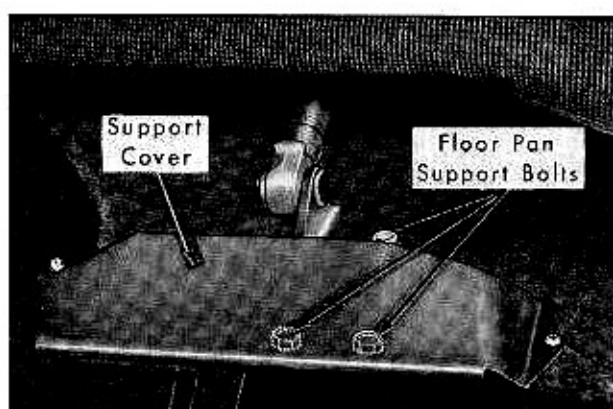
Horizontal Regulator Floor Pan Support Cover
